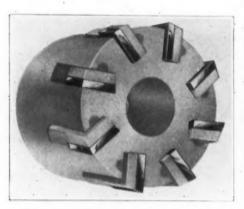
Milling Cutter with Inserted Tungsten Carbide Tipped Teeth.
